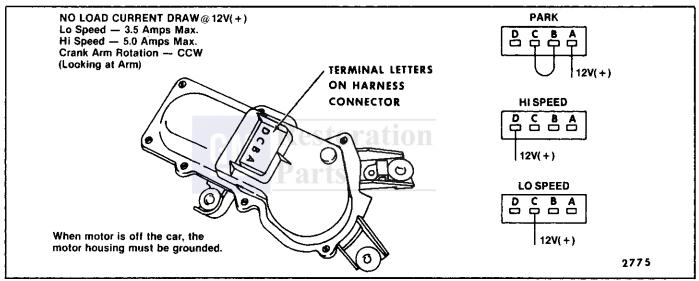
Operating Wiper Motor Independent of Vehicle Wiring
